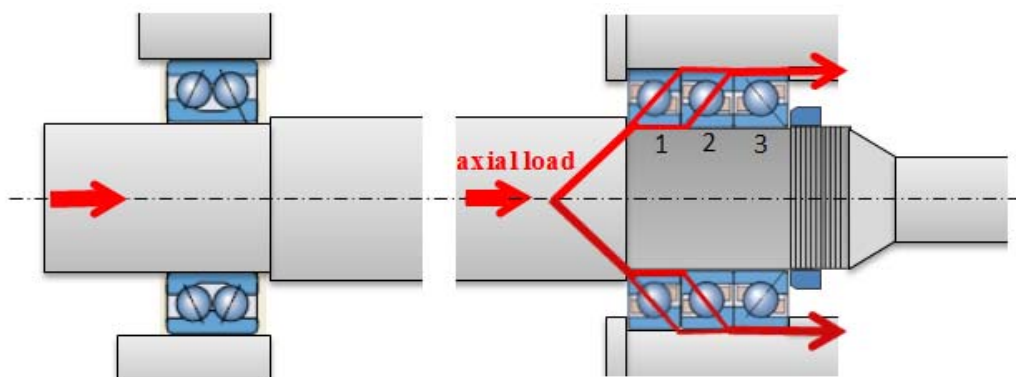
Bearing new system with a double bearing and three angular bearings.
